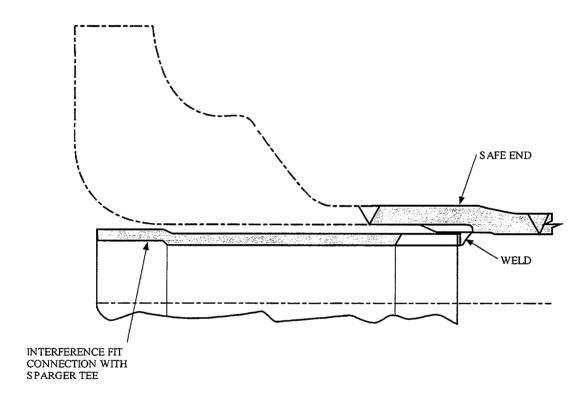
Typical Single Sleeve, Inconel Weld Design
